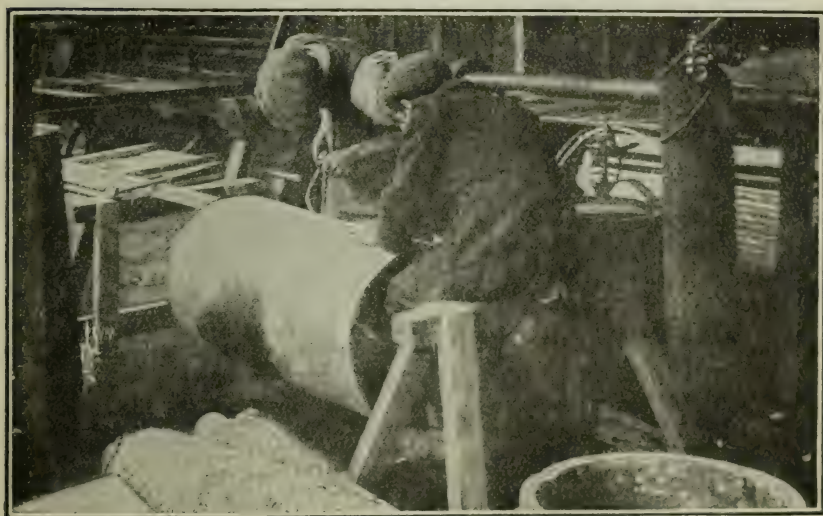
"Bonna" Pipe : Welding Steel Sheets.
